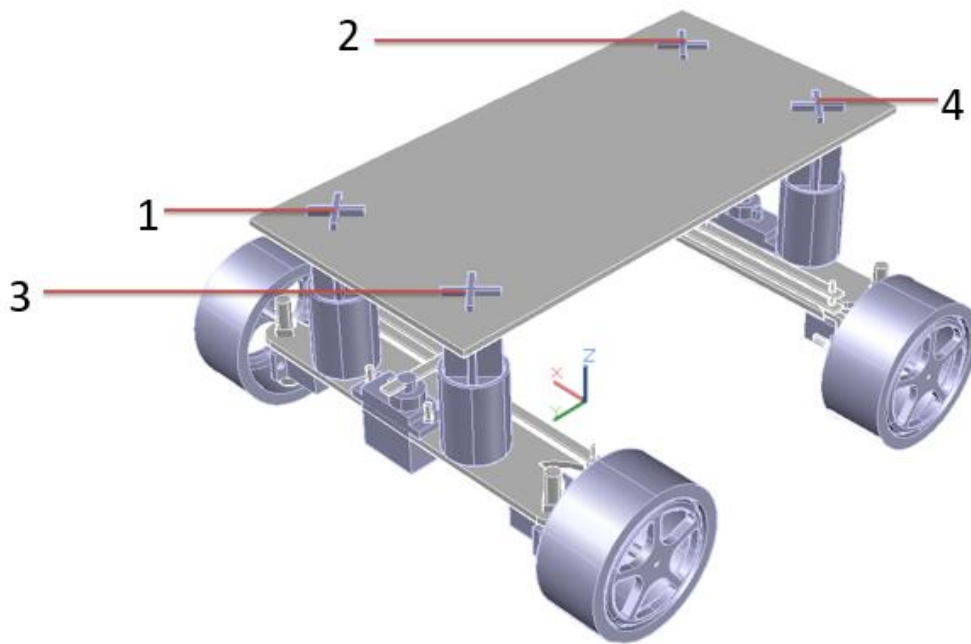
Suspension Mounting Points (1,2,3,4)
